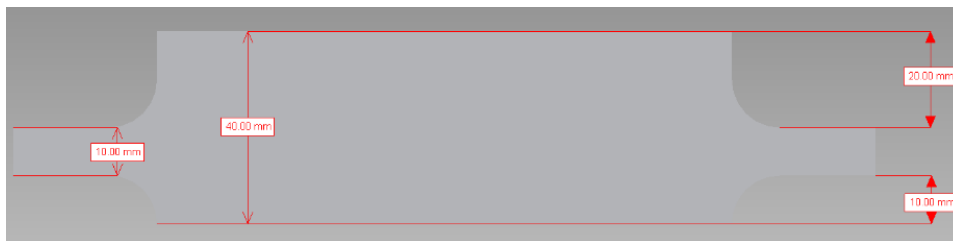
Side view model of the bottom of mould 2 with dimensions included (rendered on *Autodesk Inventor*)
